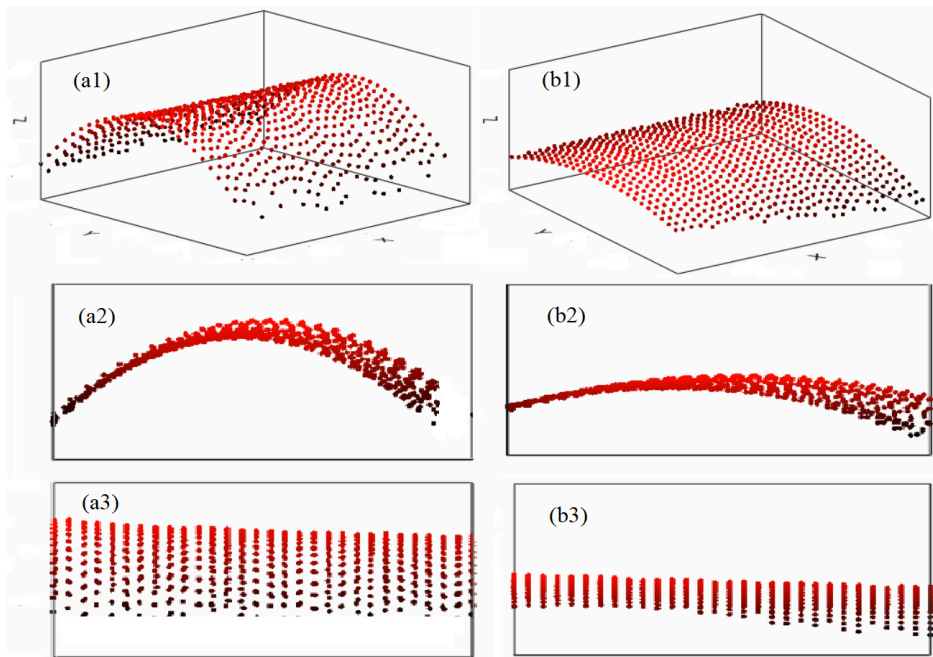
Reconstructed section of turbine blade; (a) suction surface; (b) pressure surface; (1) isometric view, (2) front view (along the x-axis), and (3) side view (along the y-axis).
